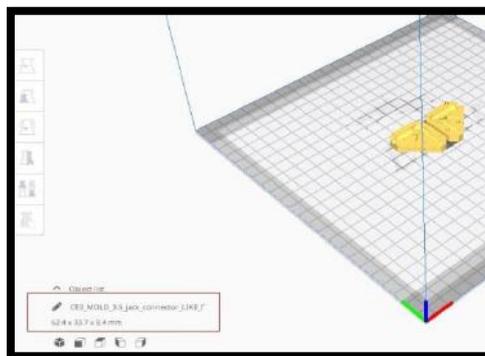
Shows the dimension of Mould are 62.4x33.7x8.4 mm
